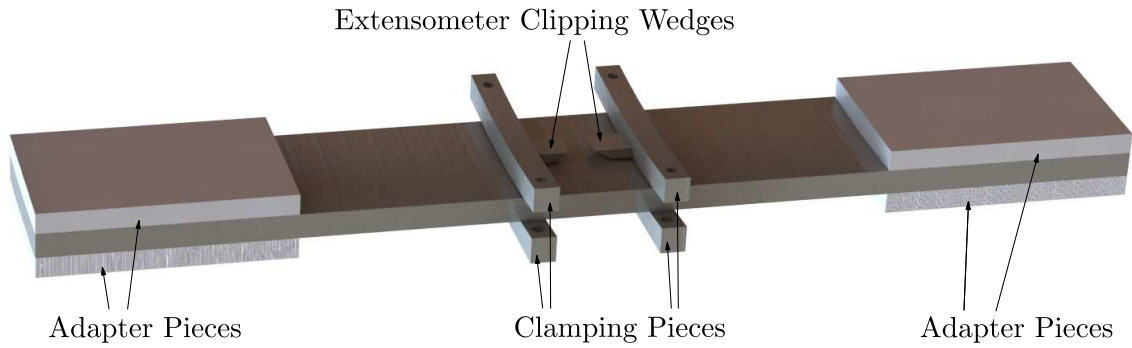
Clamping pieces for extensometer get bolted onto each other in order to clamp to the specimen and adapter pieces preserve the curvature of the specimen when gripped by the tensile testing machine
